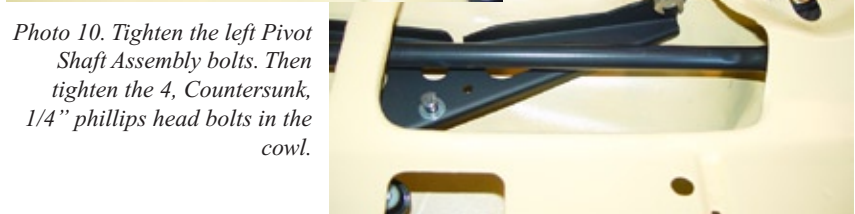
Tighten the left Pivot Shaft Assembly bolts. Then tighten the 4, Countersunk, 1/4" phillips head bolts in the cowl.
